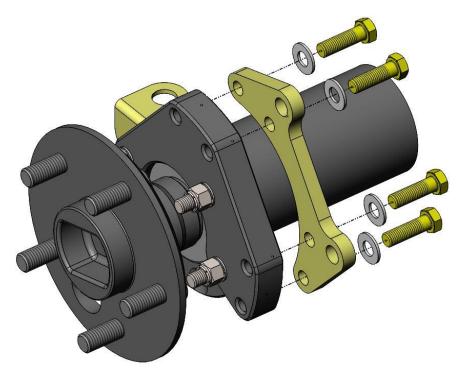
Caliper Mounting Brackets Fully Installed (DB1515BR LH Side Shown)
